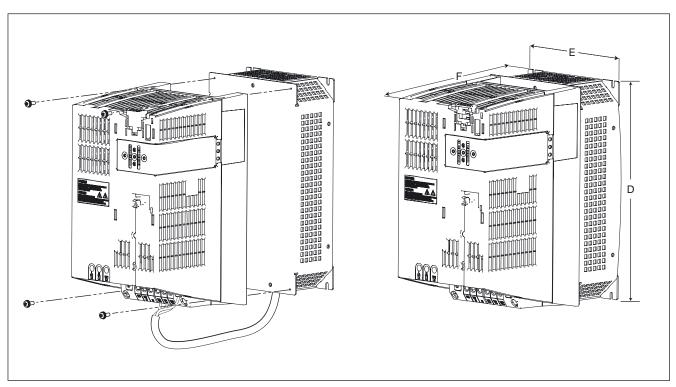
Mounting Power Modules and motor reactors, frame sizes FSB and FSC
